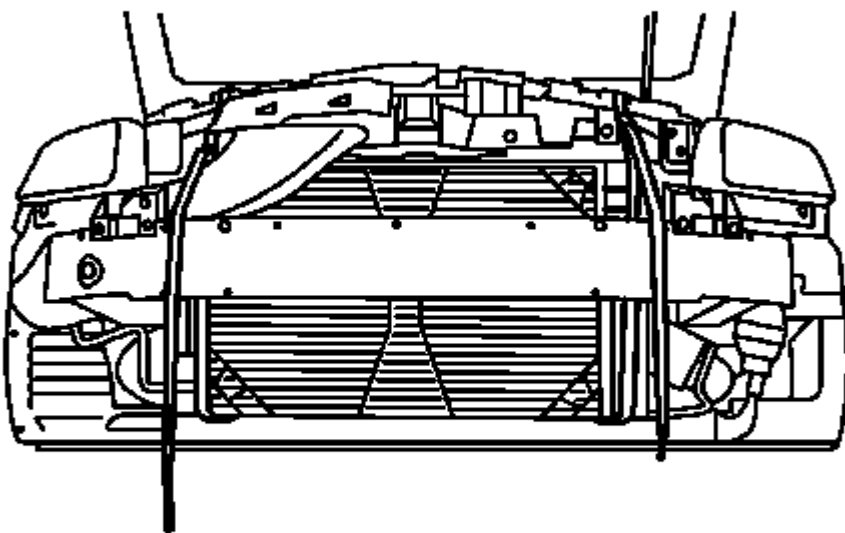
Tying Radiator, Air Conditioning Condenser And Fan Module Assembly To Upper Radiator Support
